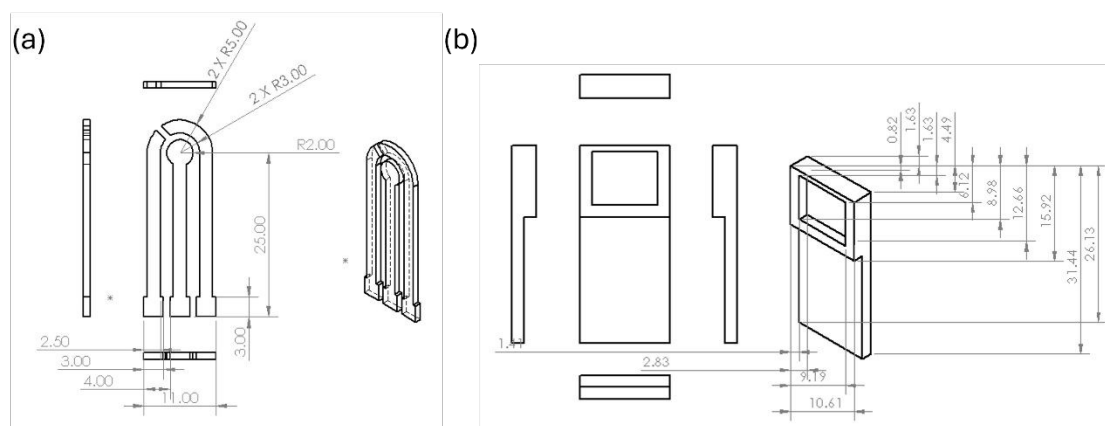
(a) The dimensions of the developed three electrode (b) front view, side view, and back view of the microelectrode with the dimensions.
